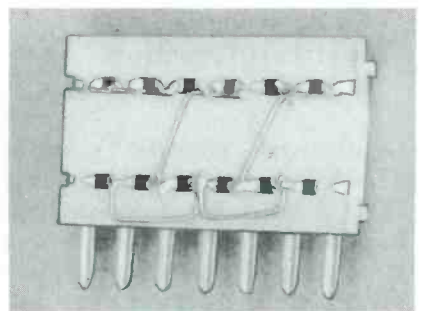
Back Side of Base Plate Showing Connections Between Components.
